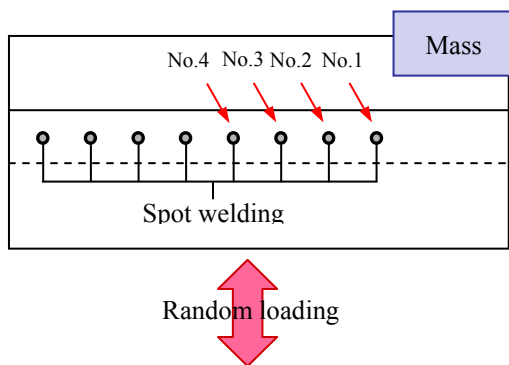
Loading condition for multipoint spot welded specimen
